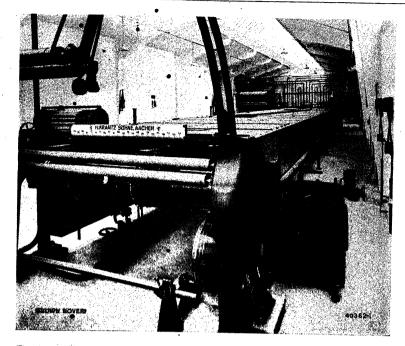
Variable-speed main drive of a stentering frame with shunt commutator motor 7.5 kW, 1600—320 r.p.m., with auxiliary motor for remote control; 12 auxiliary drives with squirrel-cage motors for fans and width adjustment.
